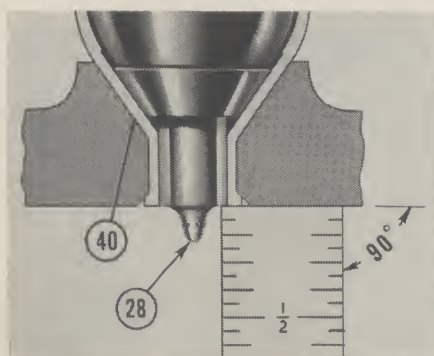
A—GM engine. Showing flush condition of injector spray tip shoulder relative to machined surface of cylinder head.
